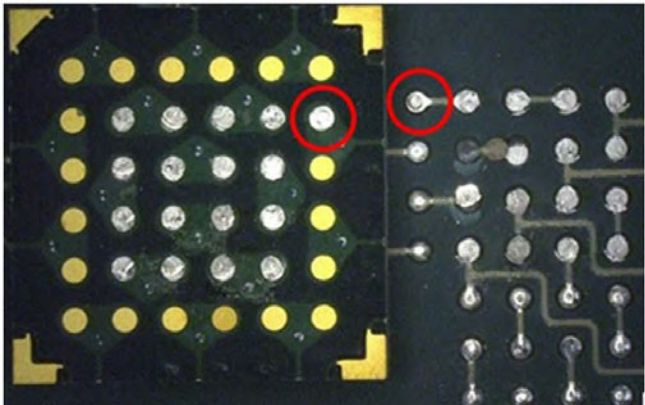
Example of HASL unit removed in shear test with ‘extra’ solder joint.
